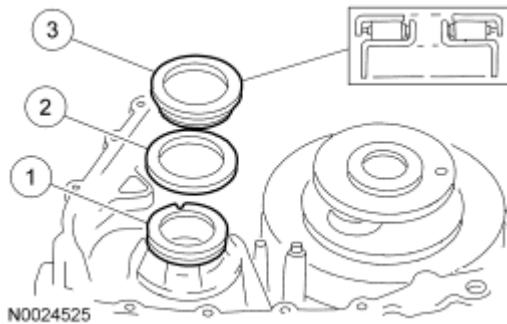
Identifying Needles & Seals In No. 18 Driven Sprocket Bearing
